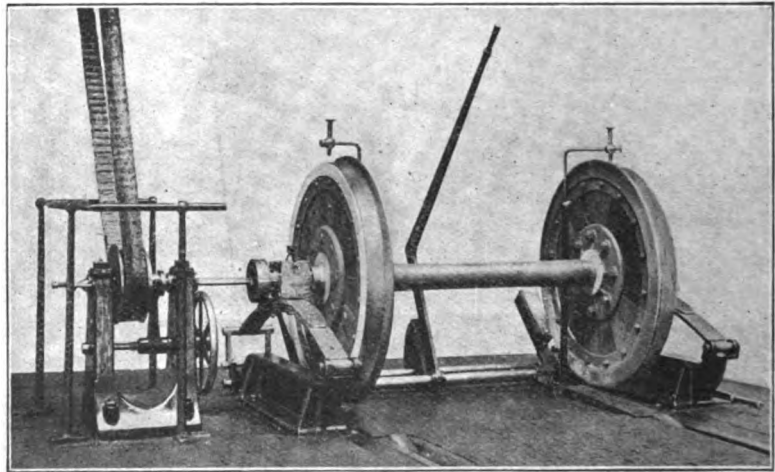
TESTING RAILWAY CARRIAGE WHEELS FOR BALANCE AT SWINDON WORKS.
